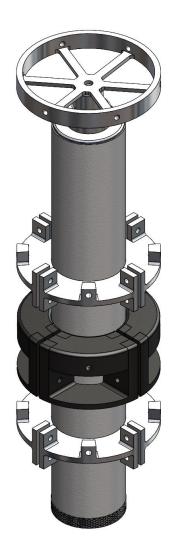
Fin Can and Motor Retention Partial Assembly
